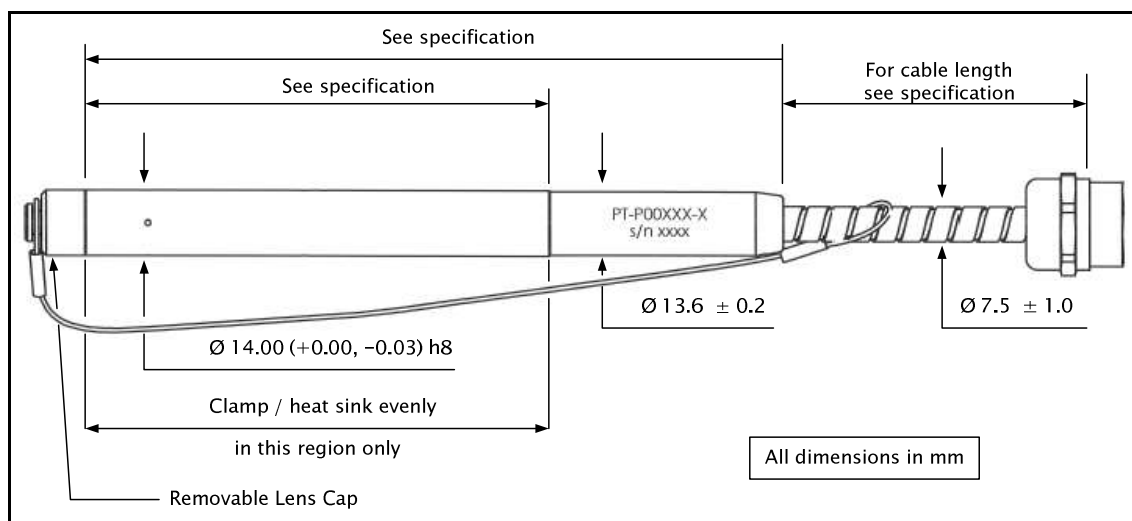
Outline Drawing – QCS Beam Delivery System
